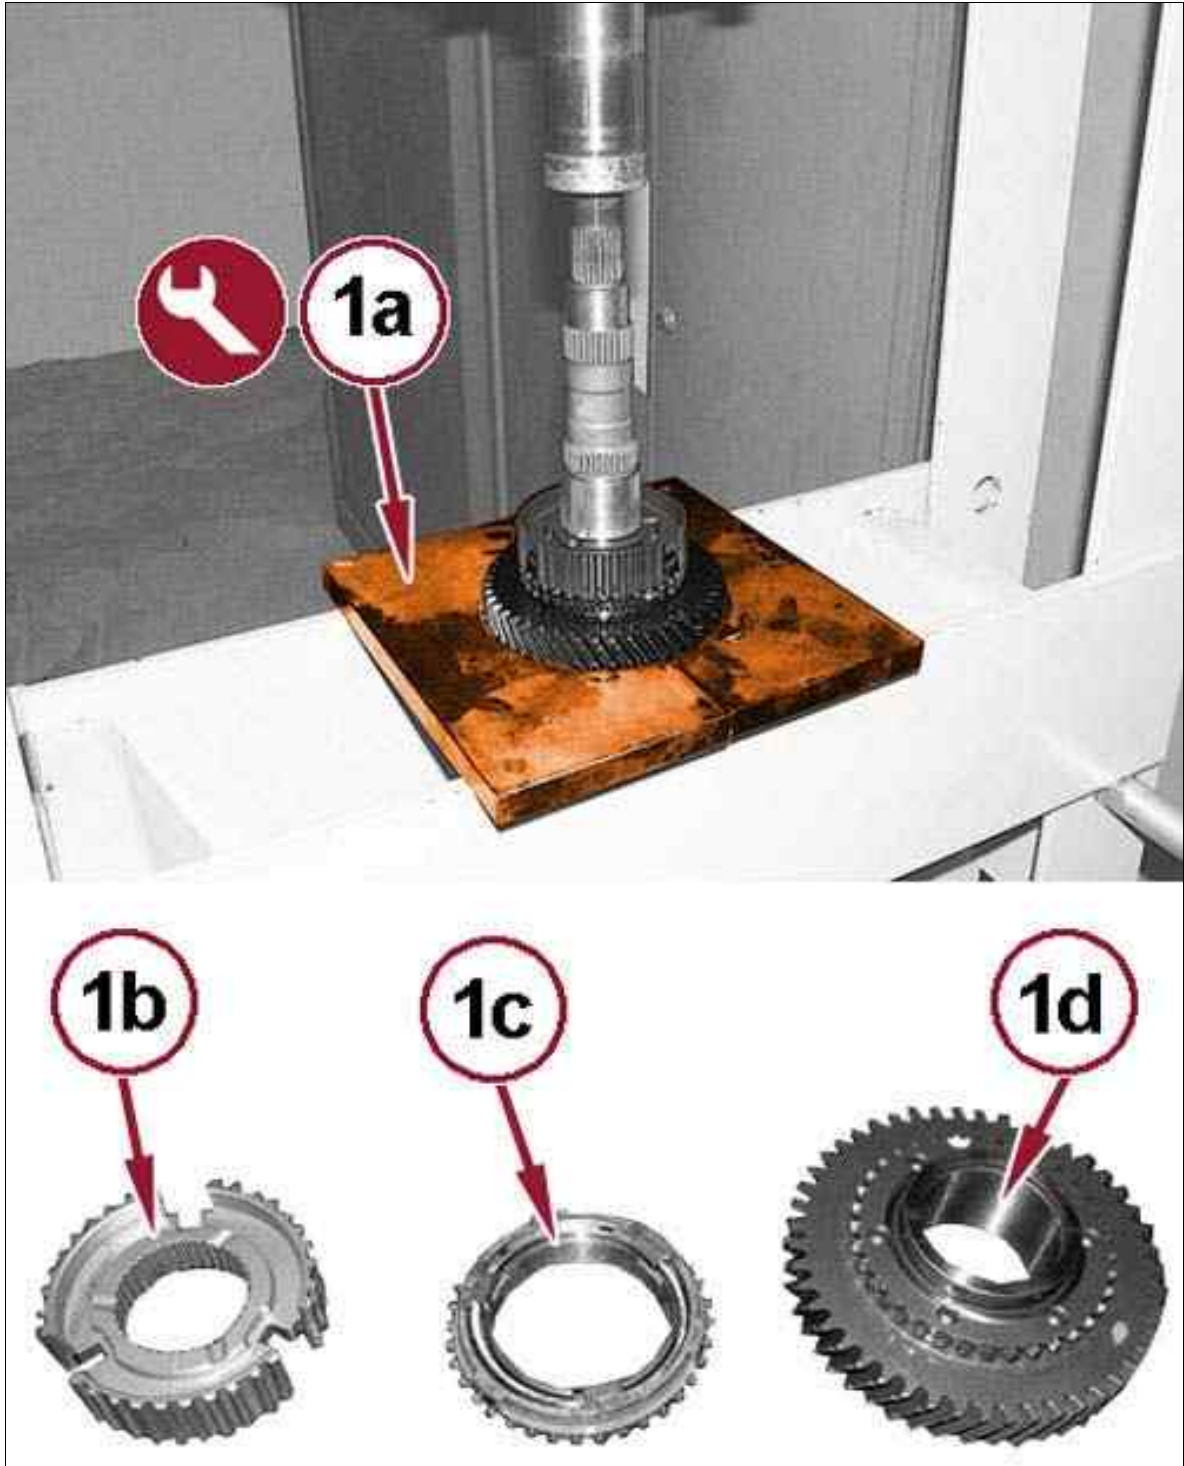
1st-2nd Reverse Synchronizer Sleeve & Synchronizer Detents
